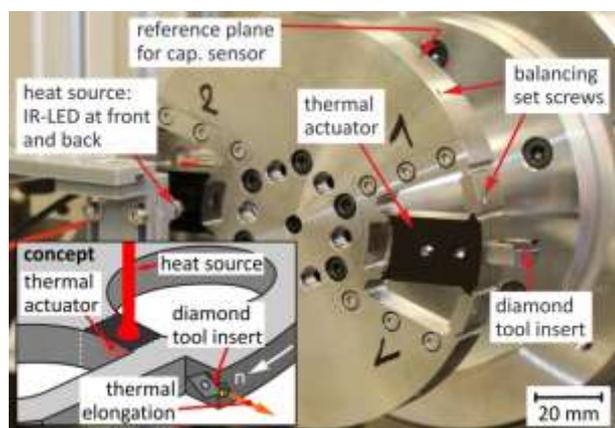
Diamond fly-cutter with two cutting inserts and thermo-mechanical actuator for tool alignment in radial direction
